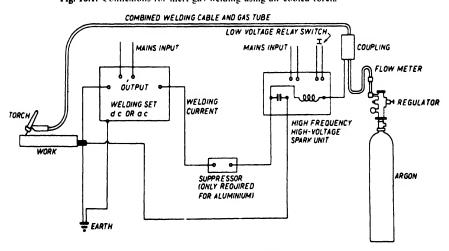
Connexions for mert gas welding using air-cooled torch.
